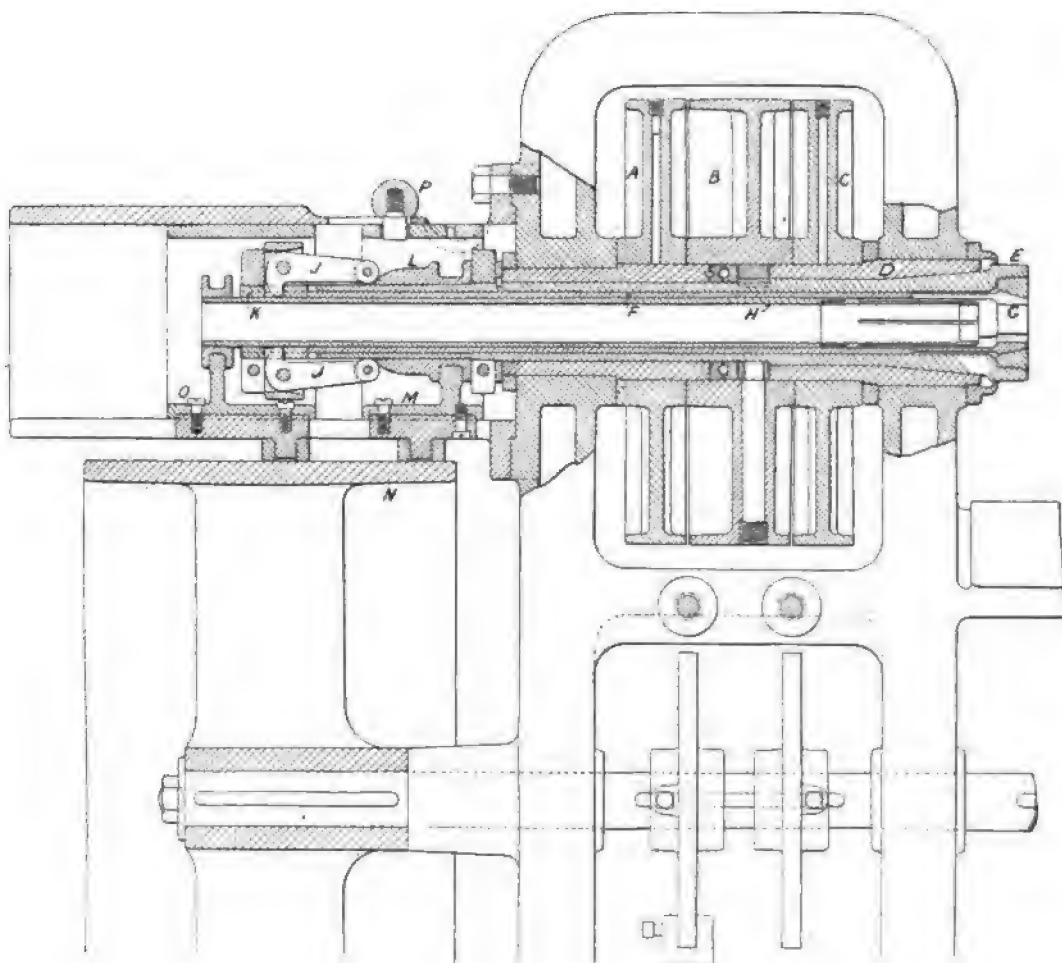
Section through Head and Work-spindle of Wolseley Automatic Screw Machine.
